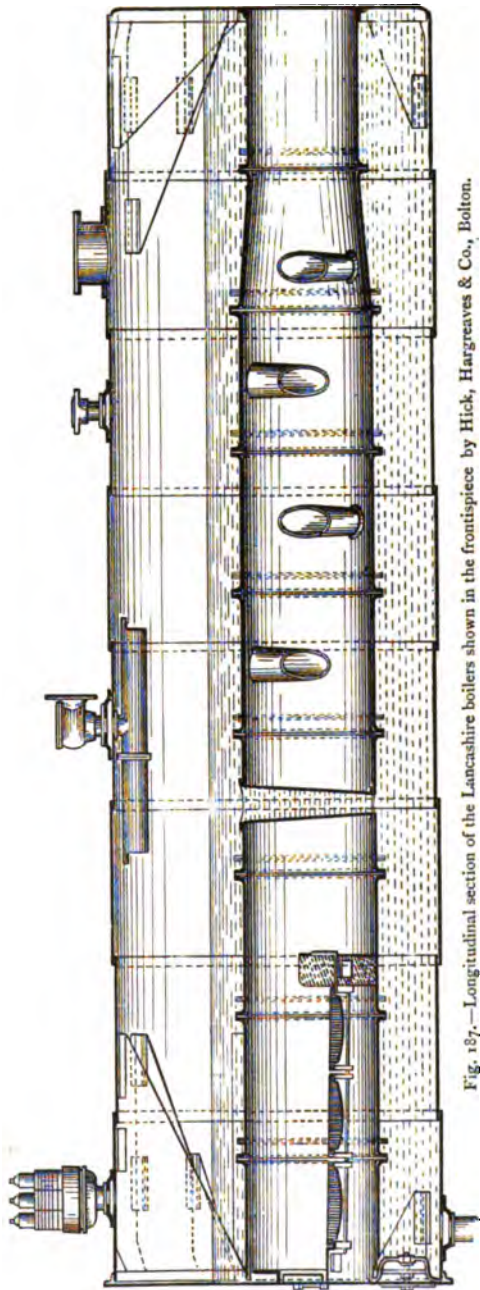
Longitudinal section of the Lancashire boilers shown in the frontispiece by Hick, Hargreaves & Co., Bolton.
